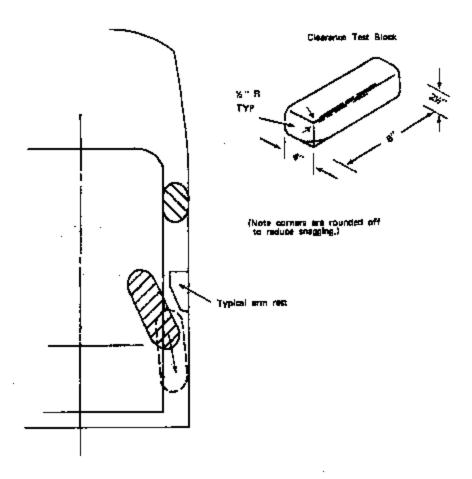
USE OF CLEARANCE TEST BLOCK TO DETERMINE HAND/ARM ACCESS
